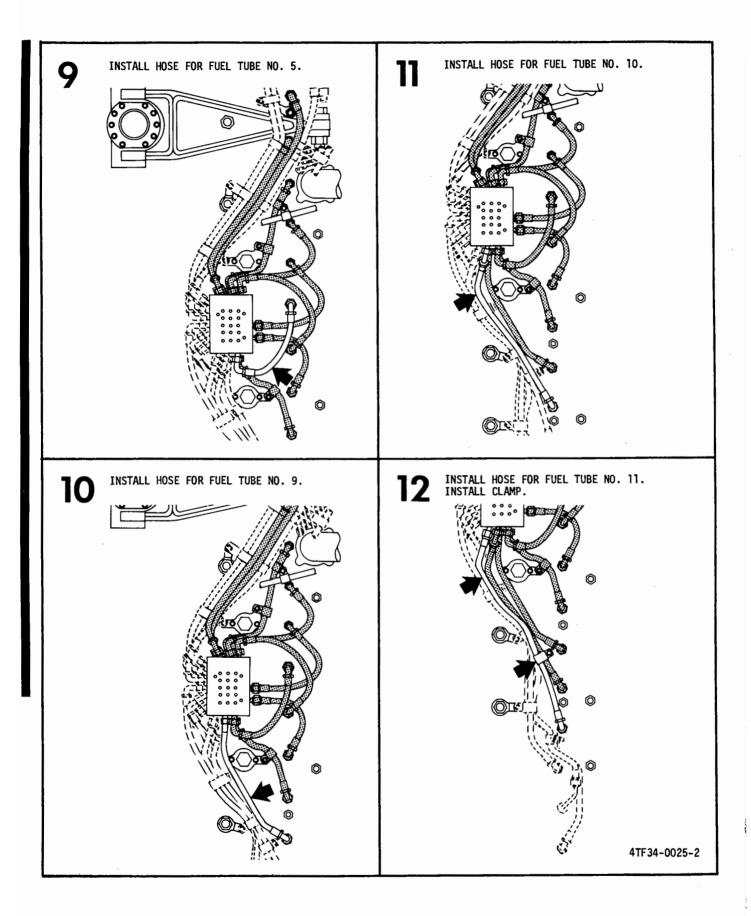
Fuel Manifold Installation (Sheet 4 of 6)
